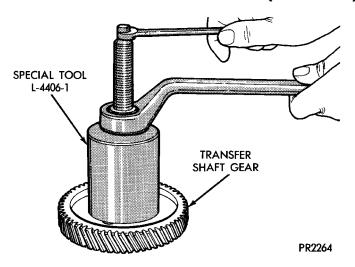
Using Tool L-4406-1 with Adapter L-4406-3, Remove Transfer Shaft Gear Bearing Cone
